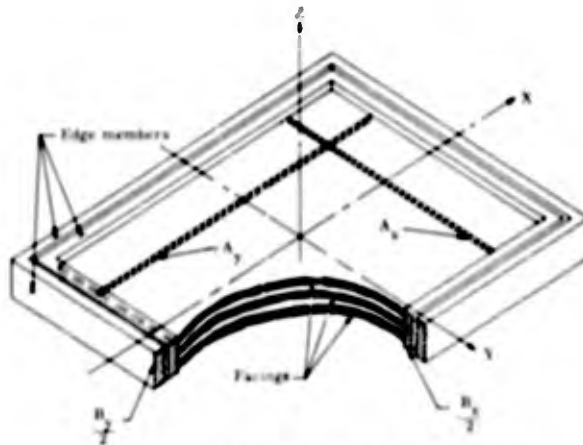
Typical Rectangular Sandwich Assembly of Flat Facings and Straight Edge Members
